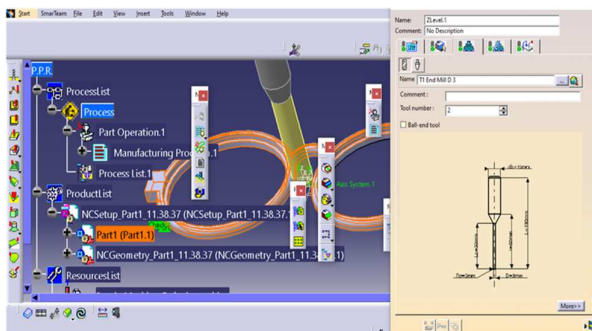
Defining the geometric parameters of the cylindrical face milling cutter for machining
